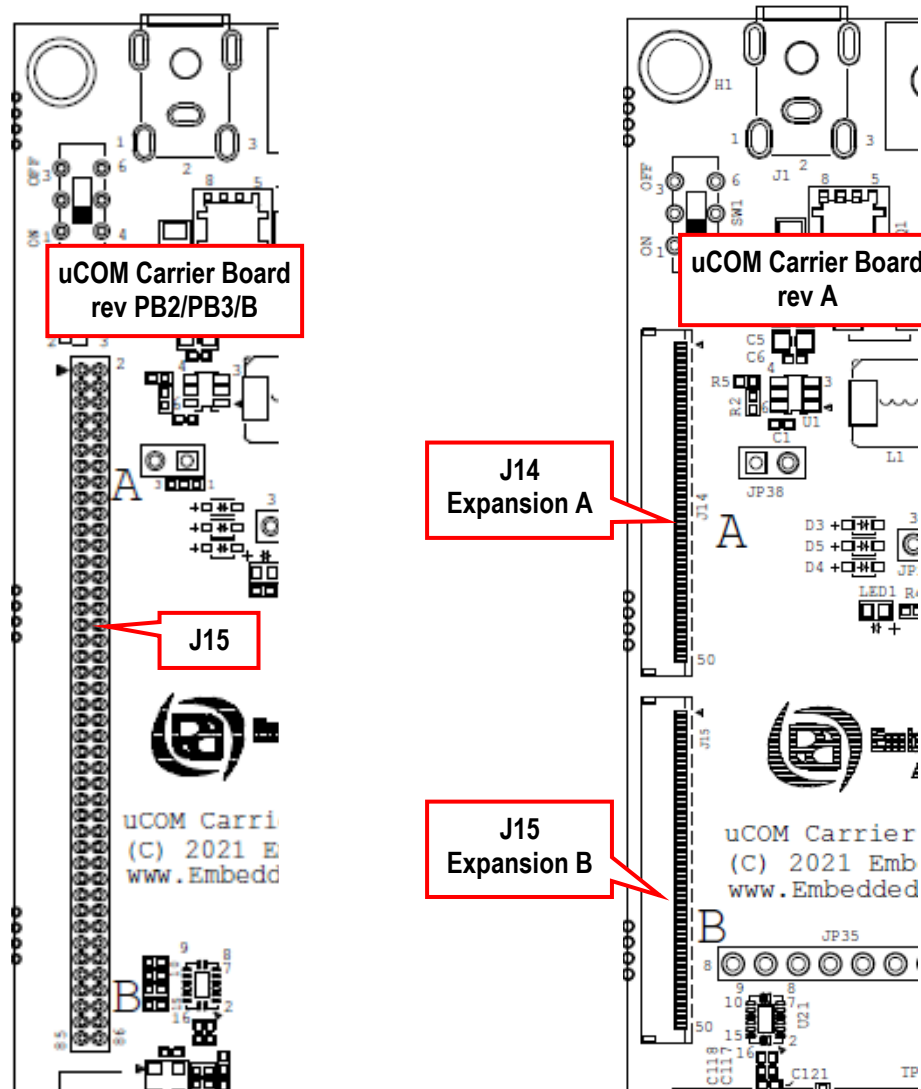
uCOM Carrier Board rev A and PB2/PB3/B Expansion Connectors
